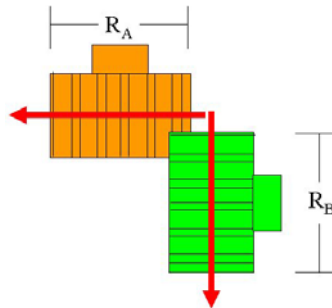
Gears used for original generator design with respective radii: Gear A - Turbine shaft gear, Gear B - Stator shaft gear.
